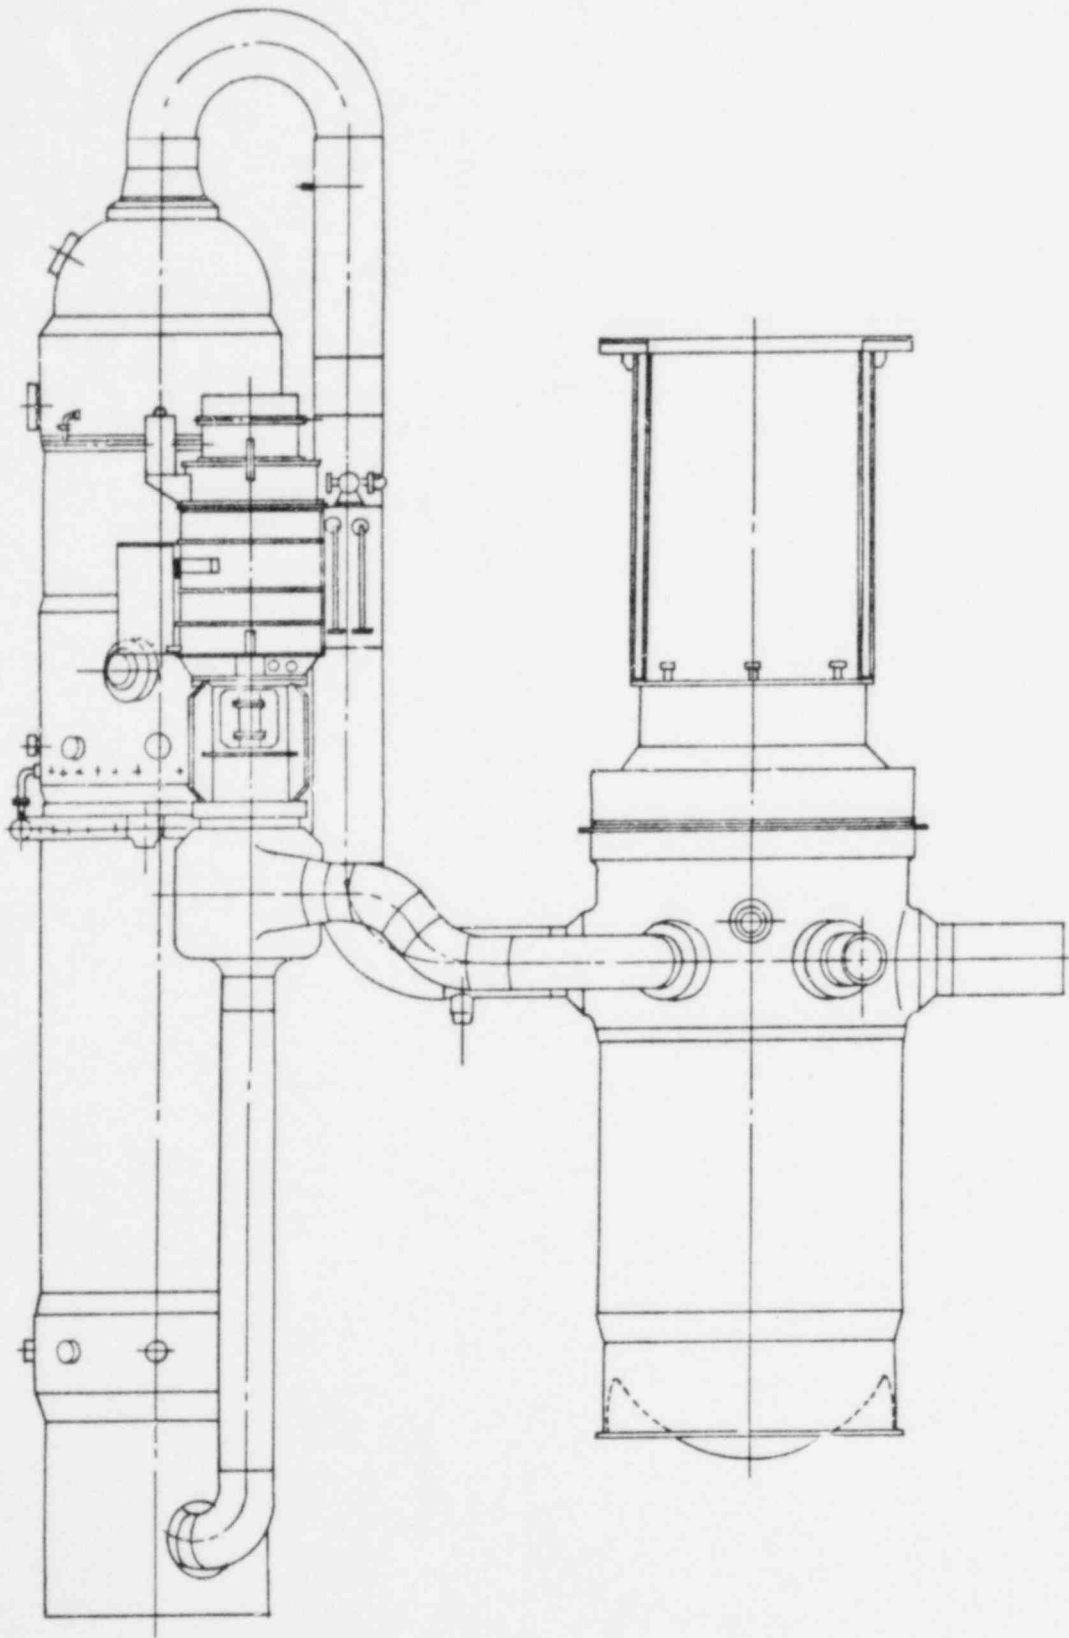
Skirt-Supported Plant, Plan View (Unsupported Pump)
